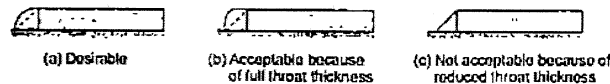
Full size fillet weld applied to edge of section
